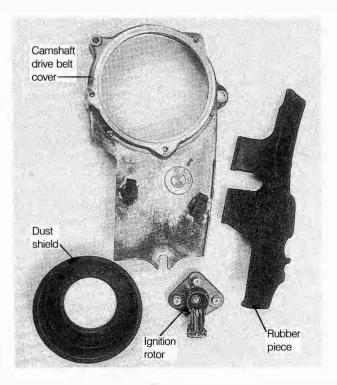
Camshaft drive belt cover and rubber piece shown removed. Dust shield and ignition rotor also shown.
